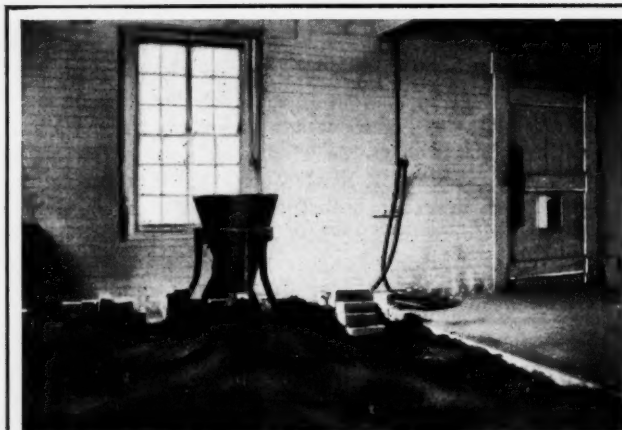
The Crucible and Mold ready for Butt-welding Steel Rails.
